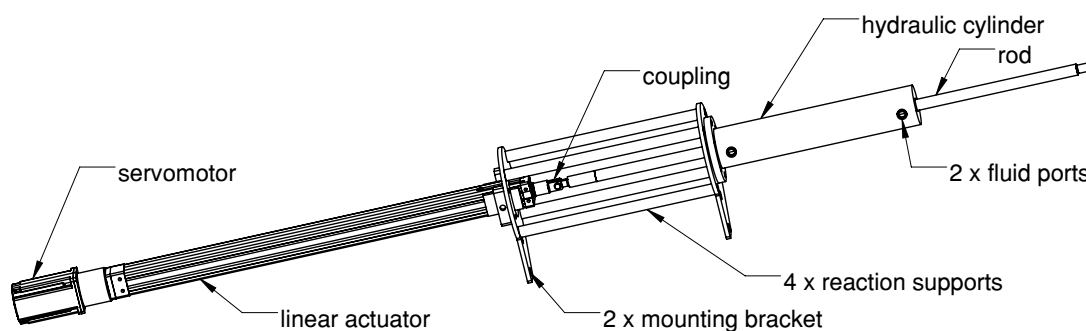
Gas pump composed of servo-motor driven linear actuator, hydraulic piston cylinder, and framework. Rectification manifold not shown.
